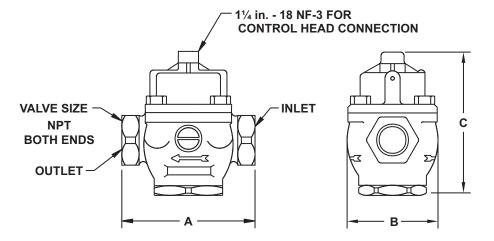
1/2 in. Thru 2 in. Stop (Direction) Valves
